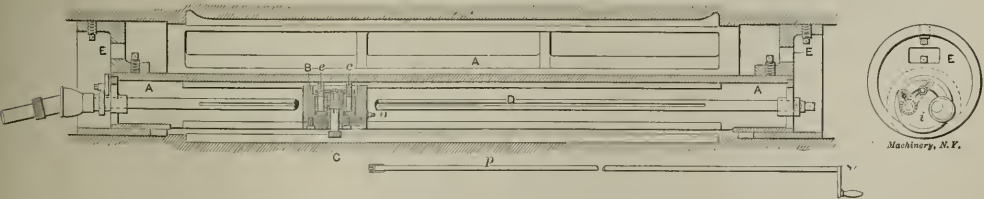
Detail of Portable Tool for Drilling Corliss Engine Cylinders.
